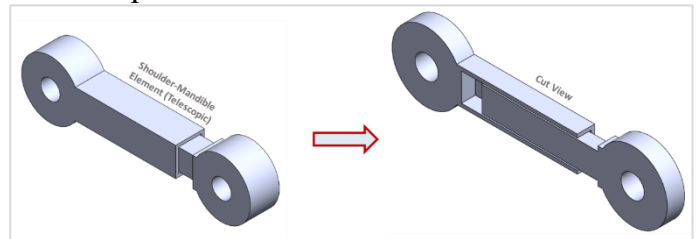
Cut View of the improved Shoulder-Mandible Element
